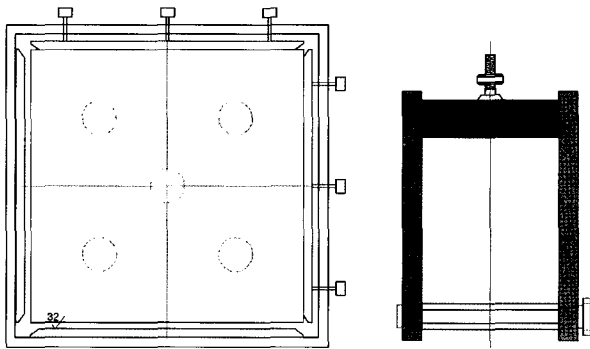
Schematic Drawings of the Fixture and the Loading Bar
